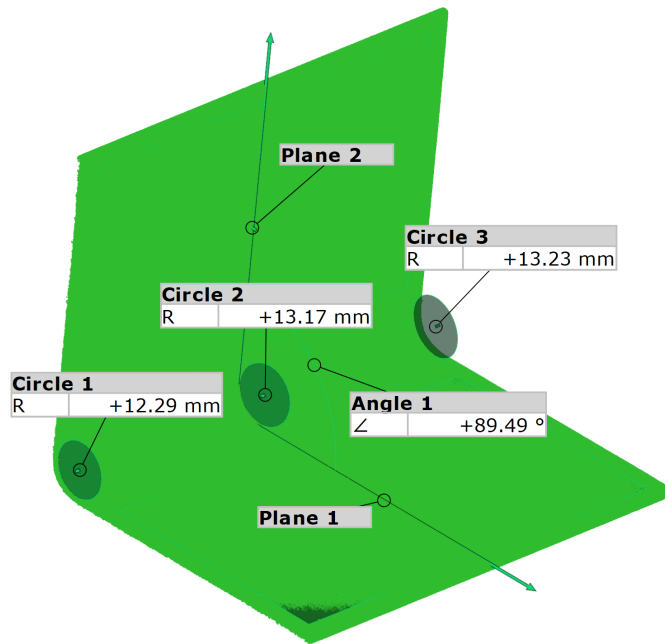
Corner radius of the aluminium tool measured near the edges and middle of the tool (3D scanner point cloud).
